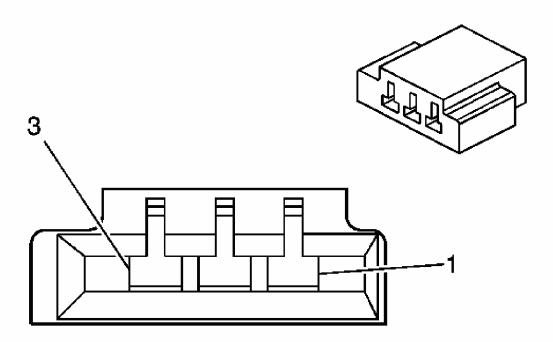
Garage Door Opener Transmitter (UG1) Connector End View Courtesy of GENERAL MOTORS CORP.
